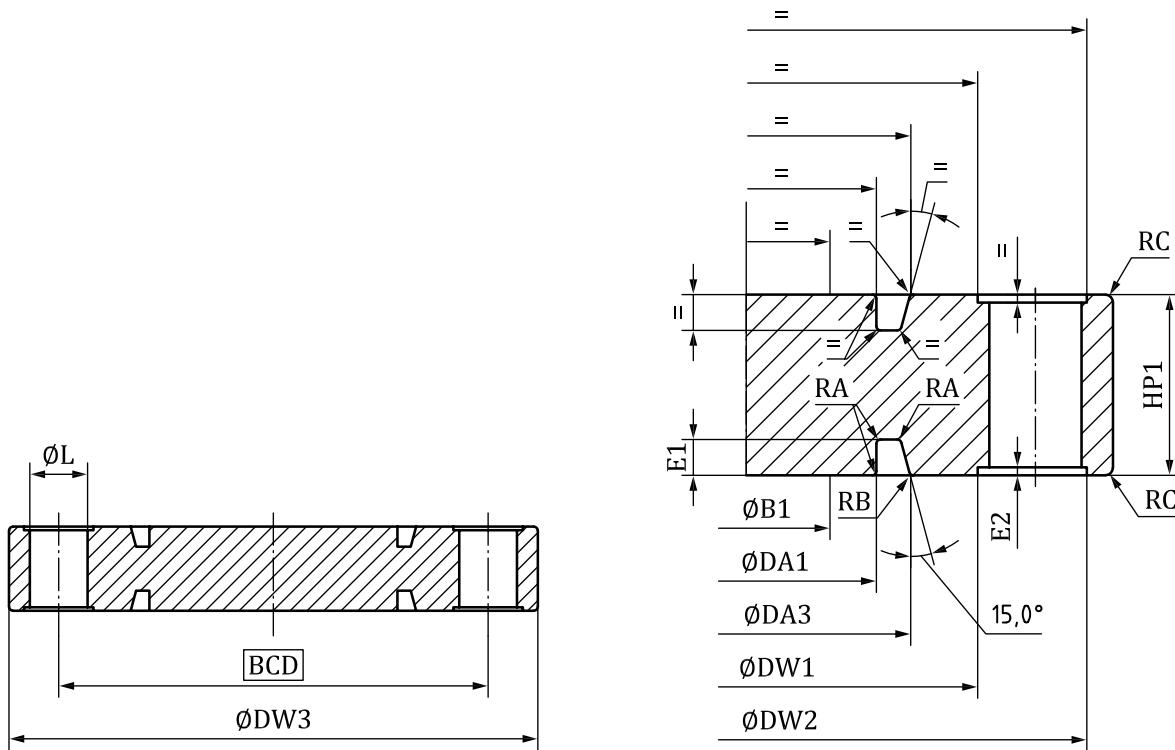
Nomenclatures for paddle blank (PB) flanges
